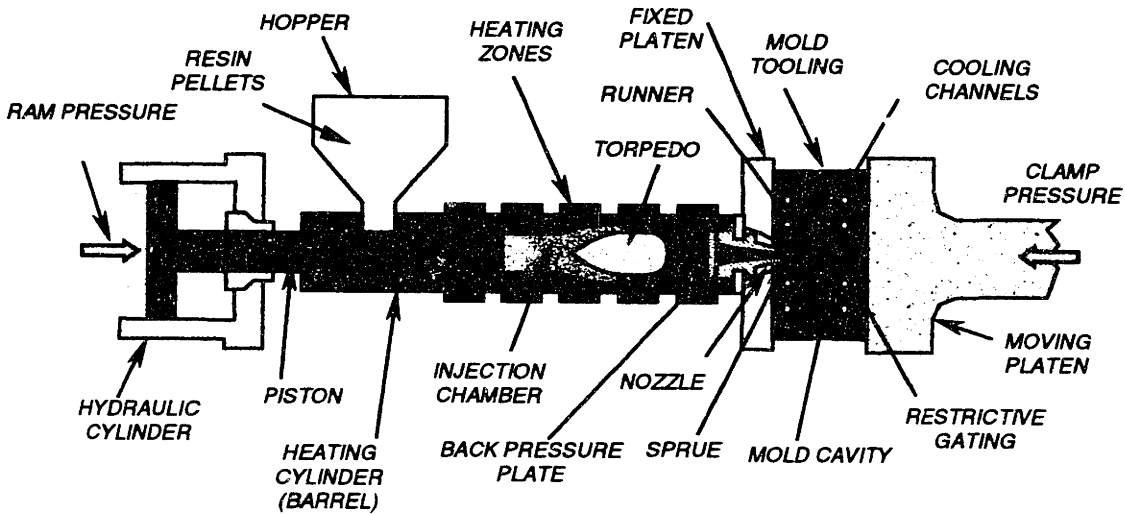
Cross-section of Typical Injection Molding Equipment.
